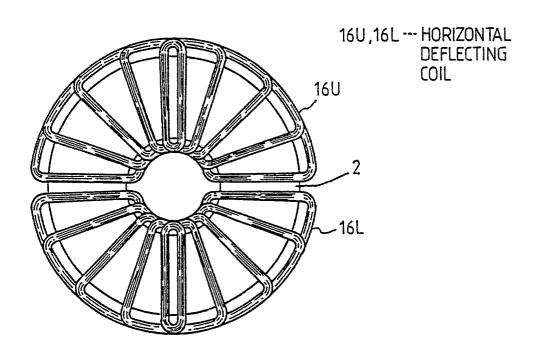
A PLANE VIEW SHOWING HORIZONTAL DEFLECTING COILS
